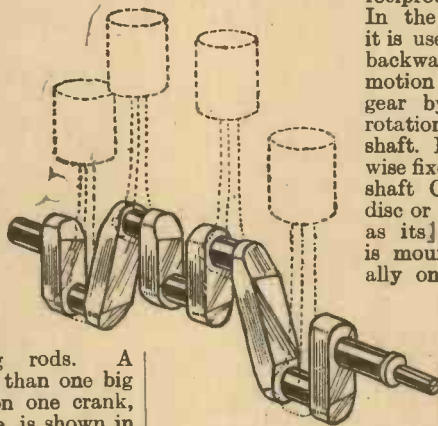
The arrangement of the cranks in a 4-cylinder engine (three-bearing crank shaft).
